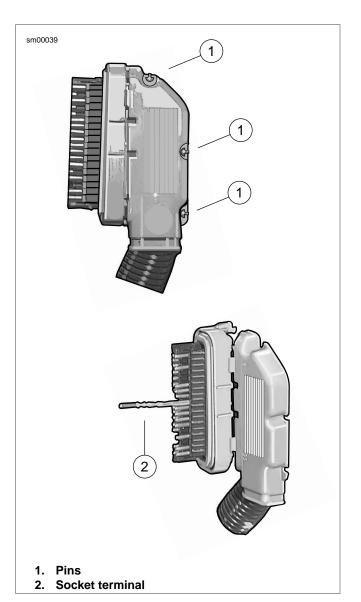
Packard 100W Connector: Separate Halves of Socket Housing
